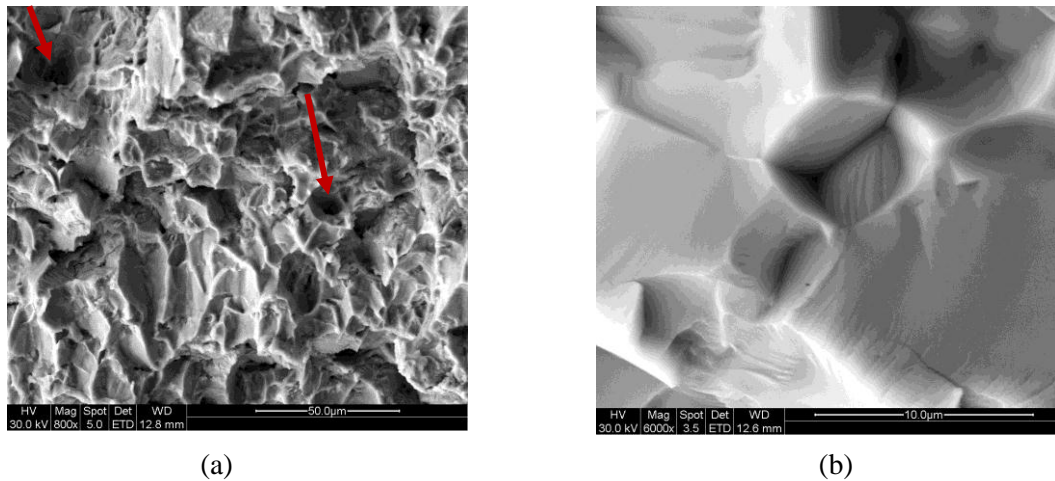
(a) Cavities in the fracture surface (b) Magnified view.
